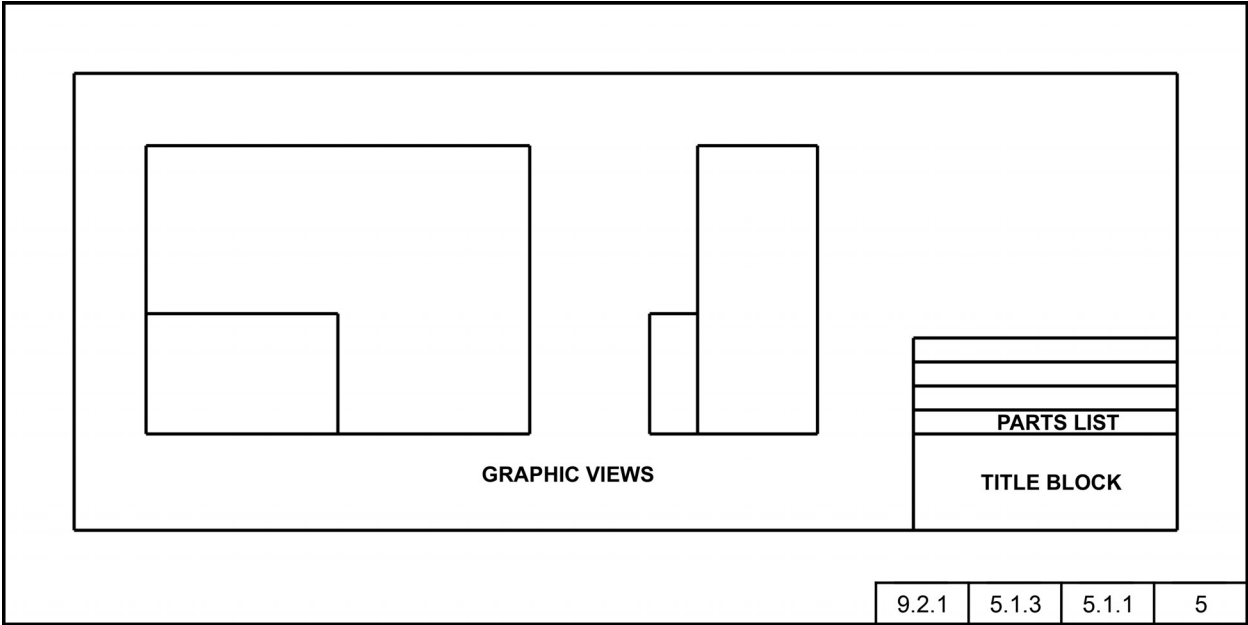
Integral Parts List – Separate Sheet of Drawing
